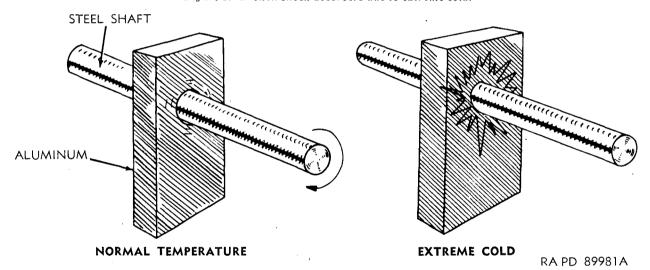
Steel shaft in aluminum bearing in normal and extreme-cold weather.
